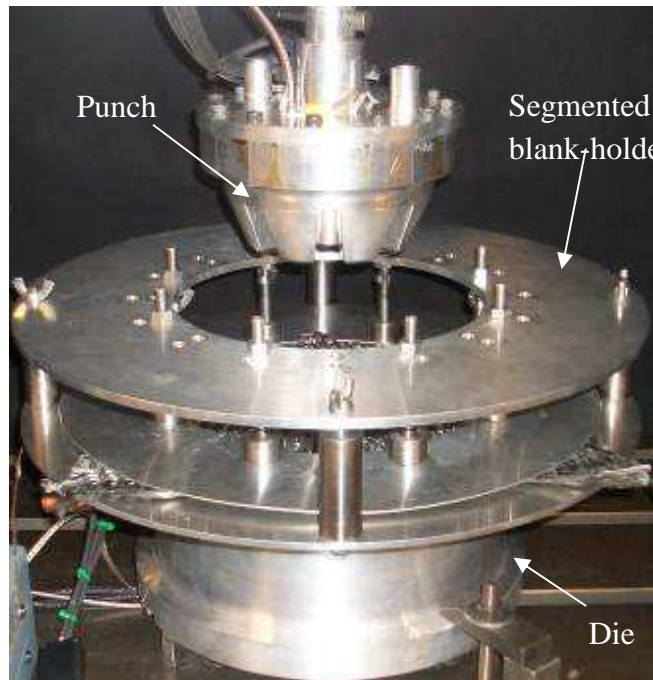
The forming station of the segmented blank-holder, the punch and the die
